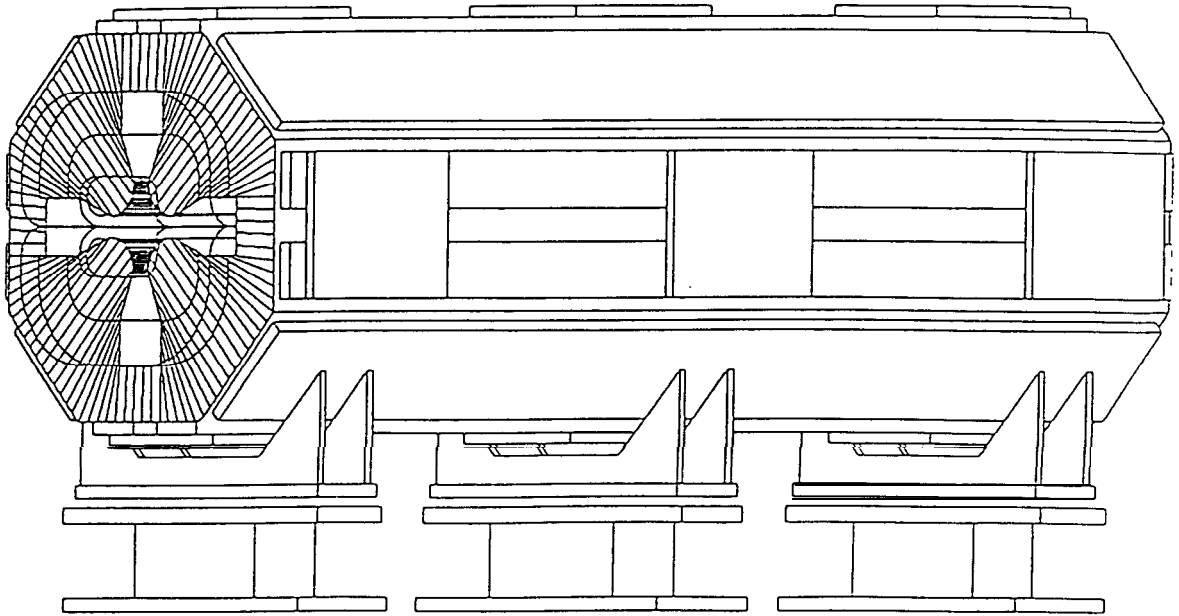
Geometrical shape of QC1 quadrupole in CAD.
